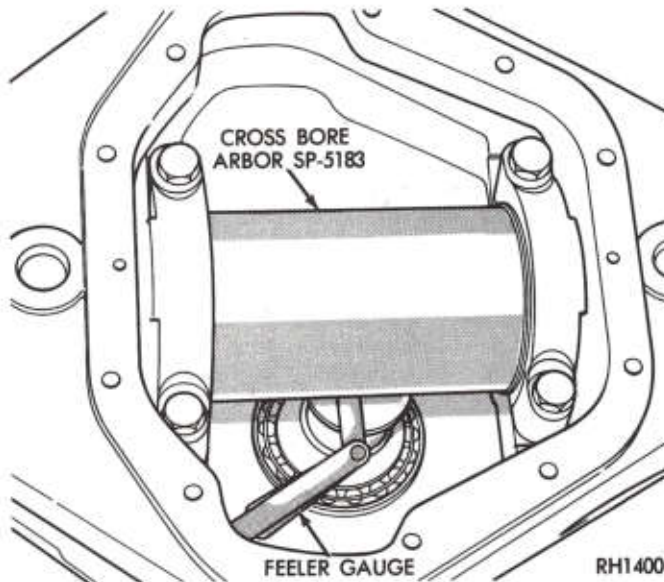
Determining Shim Pack Thickness for Drive Pinion Depth of Mesh
